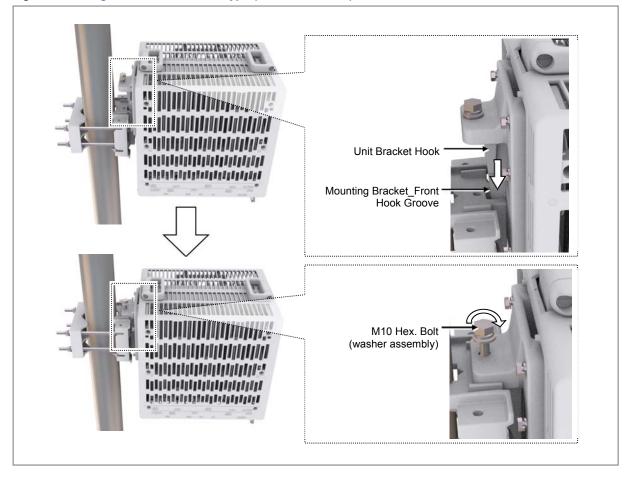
Fixing RRH\_1 Sector Wall Type (Side Installation)
